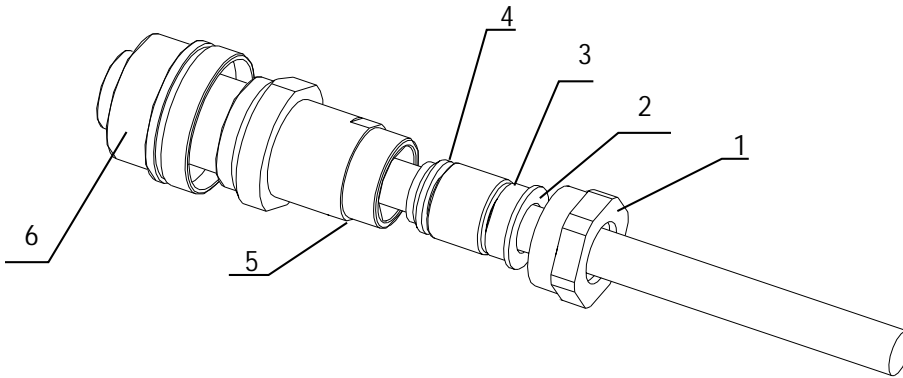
Assembling a Power Cable Connector (step 5)
